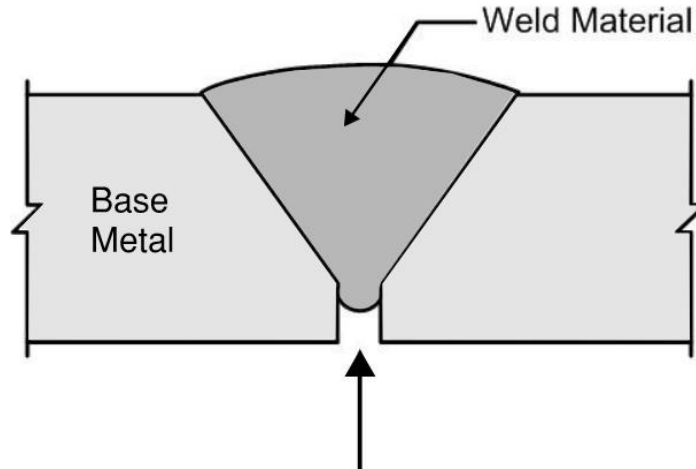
Incomplete Penetration of a V-Groove Weld
